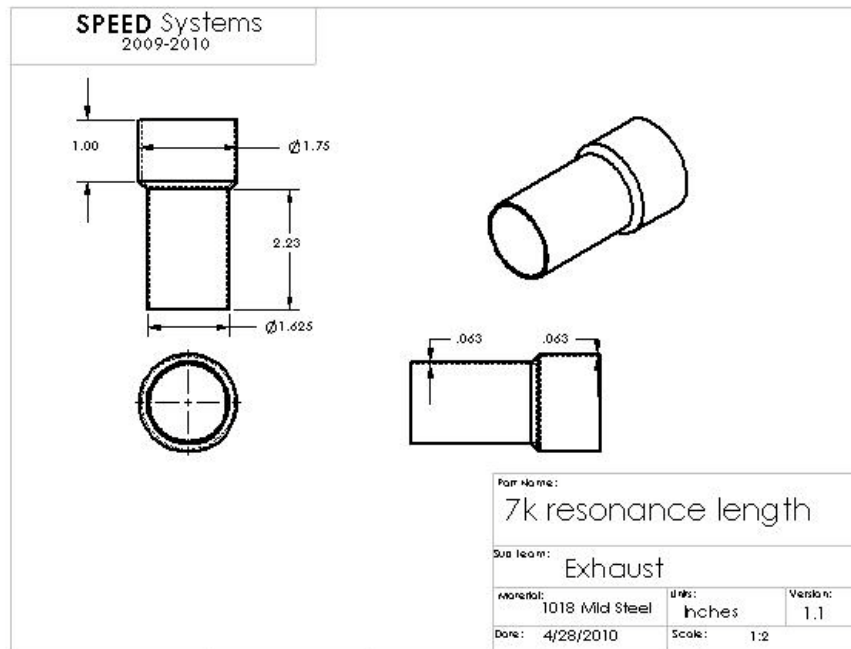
Test Piece for 7k rpm (short) Exhaust Configuration
